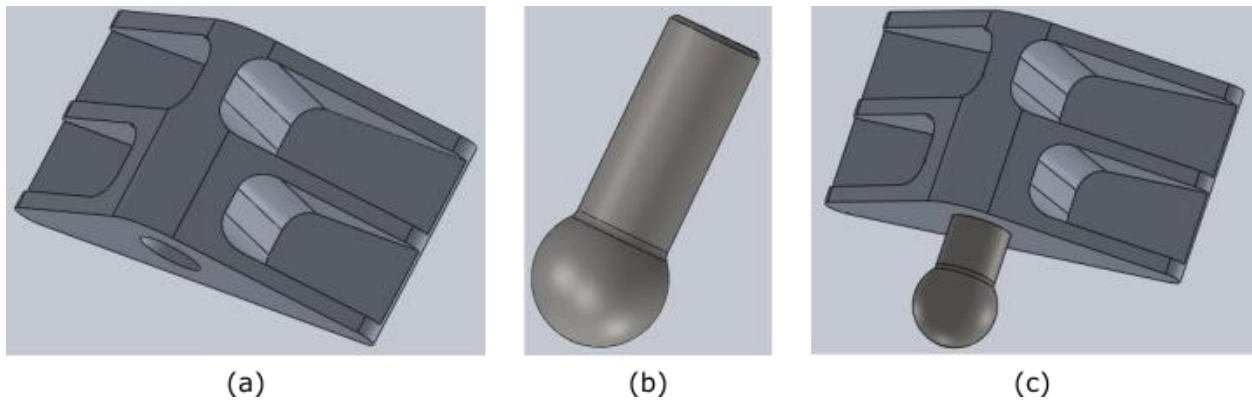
SolidWorks™ models of (a) top segment, (b) ball stud, and (c) top segment assembly.
